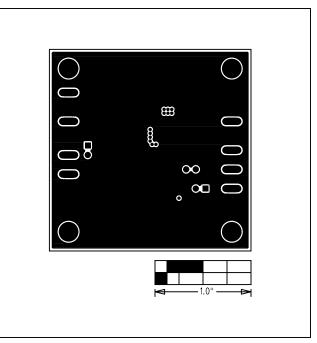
MAX17504 3.3V Output EV Kit PCB Layout— Inner Layer 1
